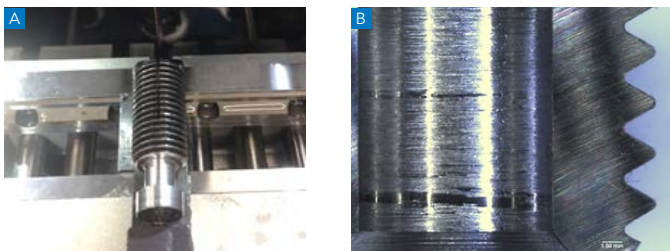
(a) shows dual clamping of a fastener, and (b) showing the thread region after sectioning.
